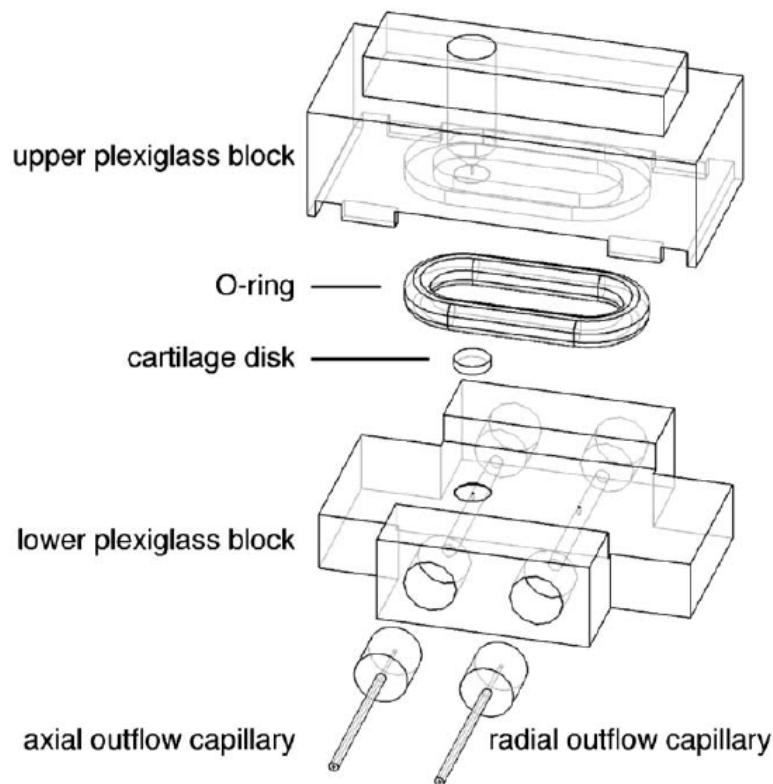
Exploded view of the apparatus designed by Reynaud and Quinn. Cartilage disks were compressed between precision-machined plexiglass blocks. In the upper and bottom parts there are $300\ \mu\text{m}$ diameter holes, which provided conduits for fluid flow. Picture courtesy of [Reynaud and Quinn, 2006].
